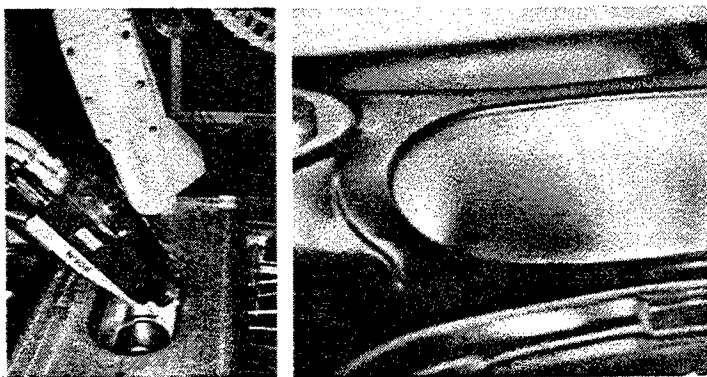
Welding of kitchen sink with a diode laser¹⁰,
